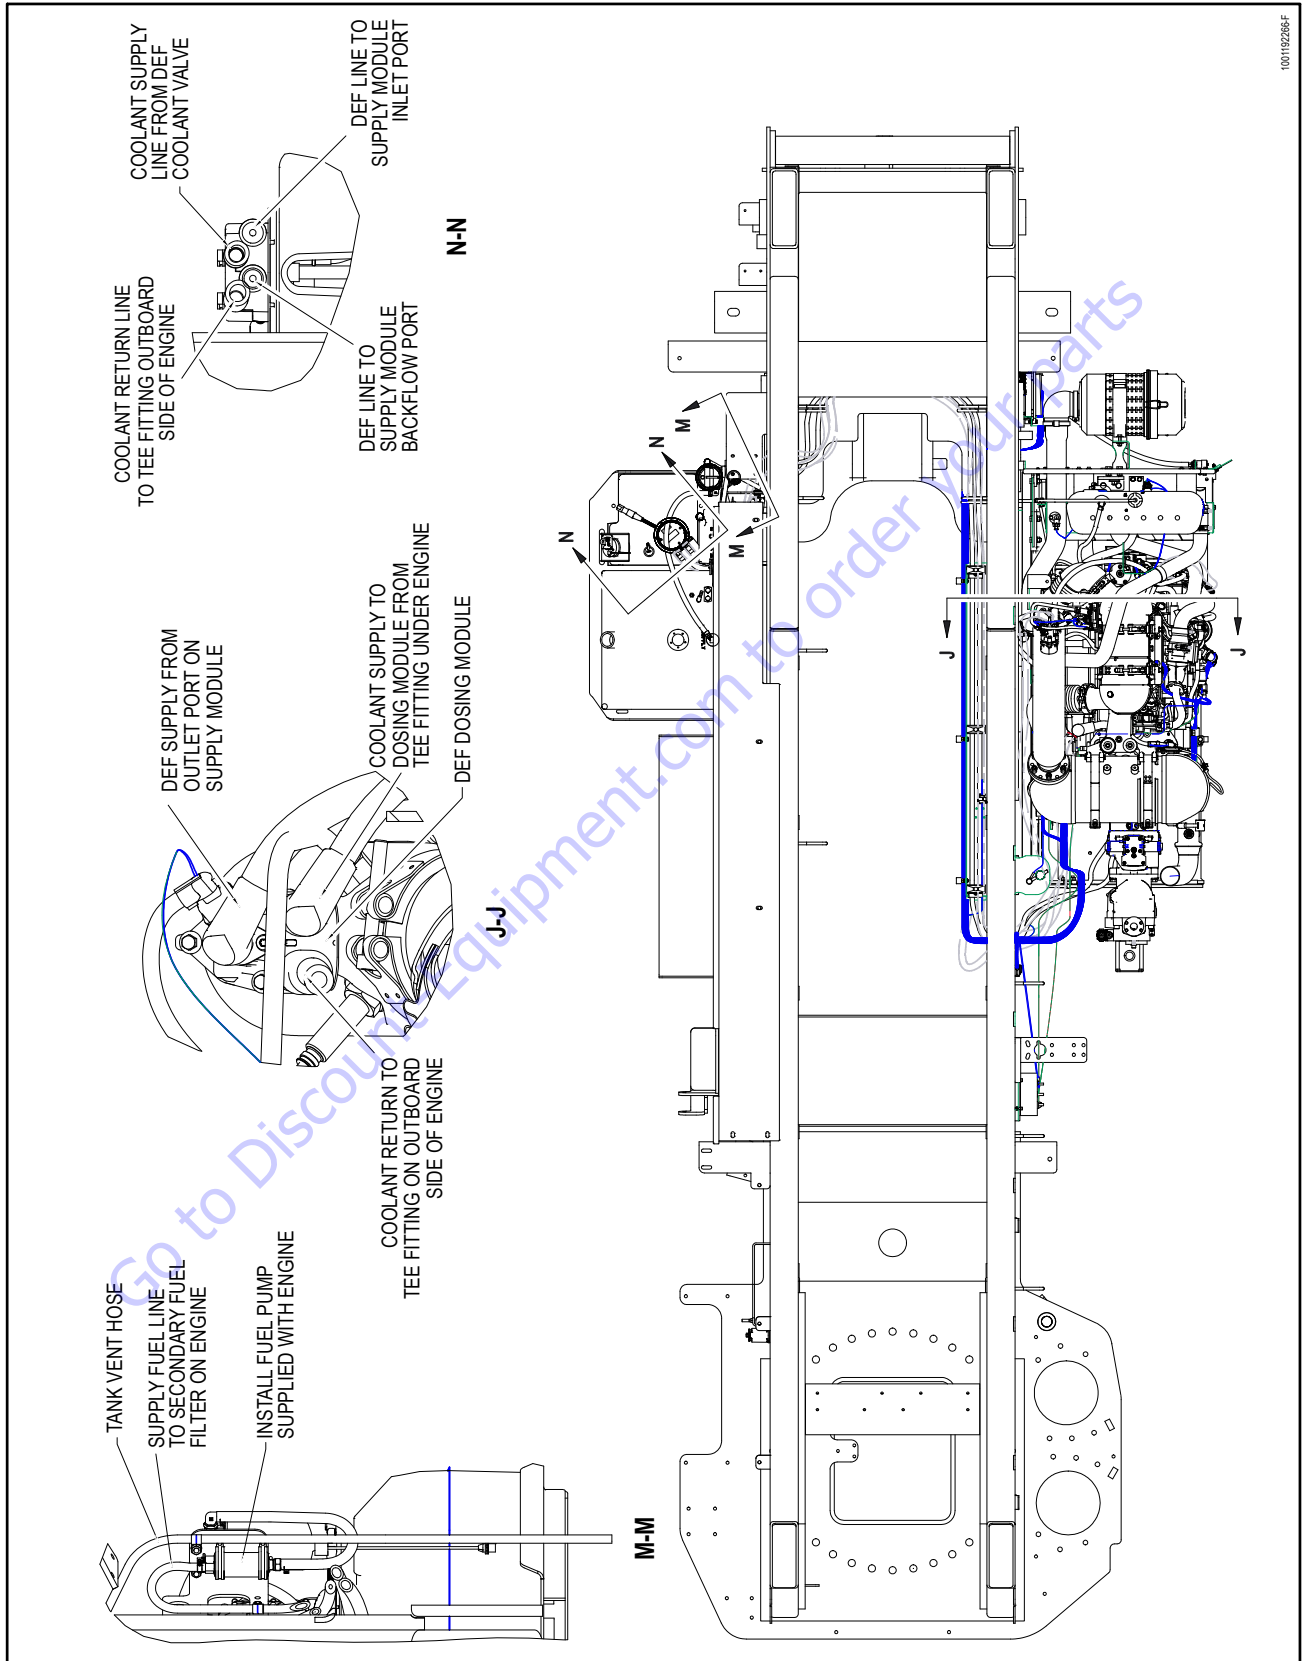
Engine Installation and Diesel Exhaust Fluid (DEF) System - Sheet 6 of 8
